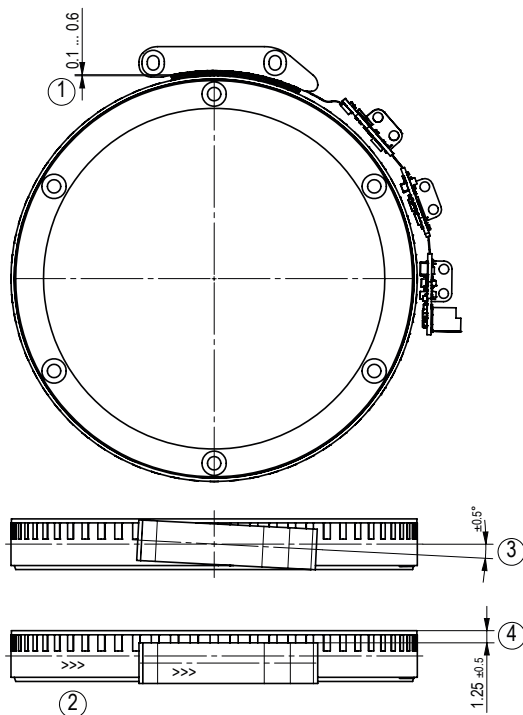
Mounting tolerances MSAC200 with MRAC200
